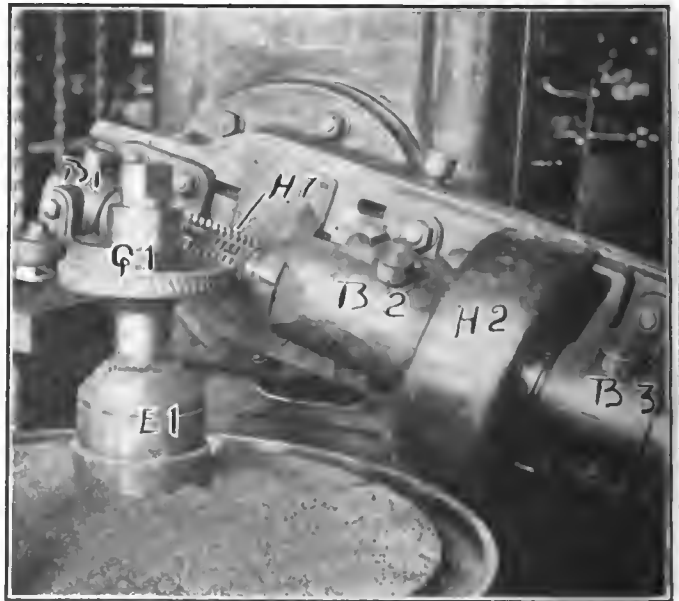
Hobbing machine working on the balancing gear of a Brush Runabout motor, showing continuous cutting operation
